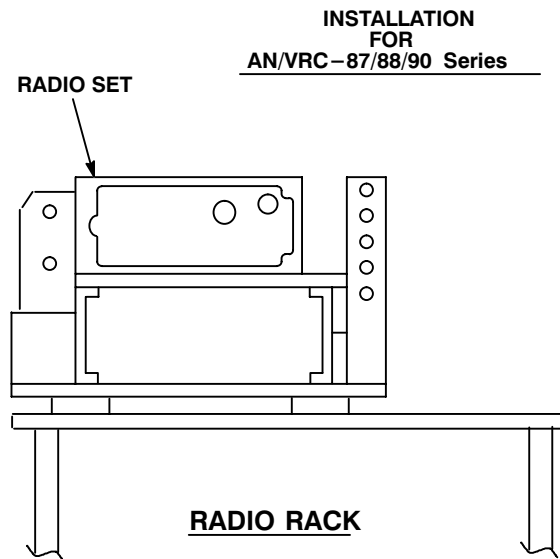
(3). MK and Radio Installation: Radio Equipment Locations
